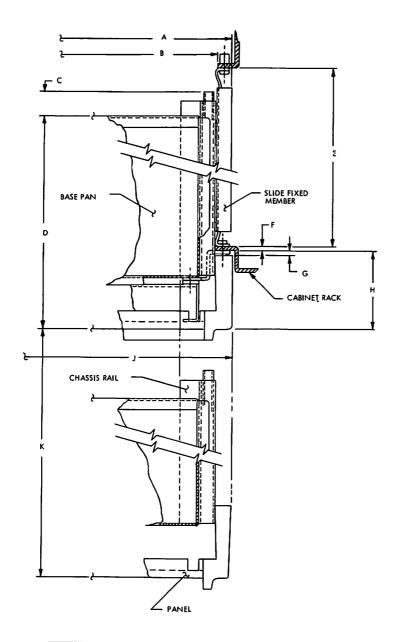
SLIDE/DRIVE MOUNTING CROSS SECTION
